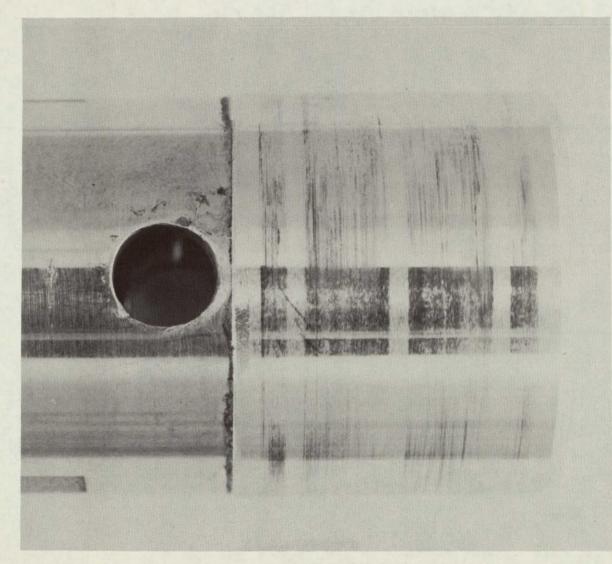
Helium Seal Turbine Side Seal Ring (RS009690X, S/N 05, Build 14, Posttest 749)
